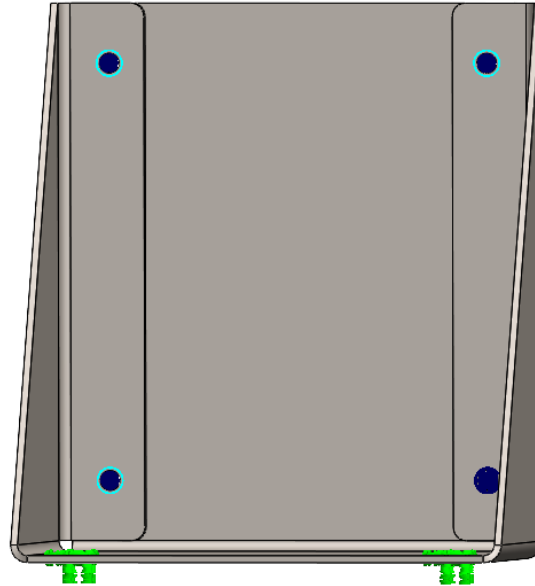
BRACKET 7 FIXTURES AND LOADING CONDITIONS.
